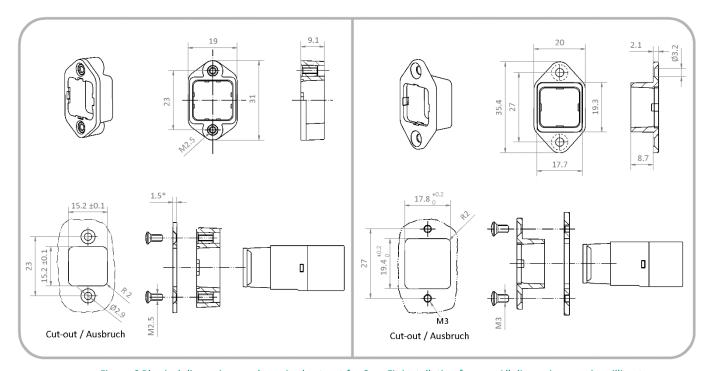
Physical dimensions and required cut-out for SnapFit installation frames. All dimensions are in millimetres.
